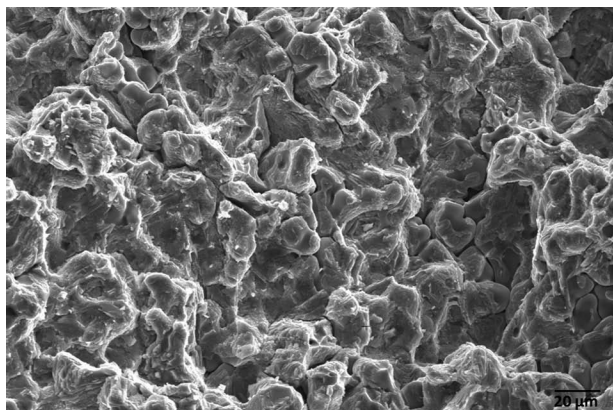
Higher magnified image of the specimen shown in Fig. 137
